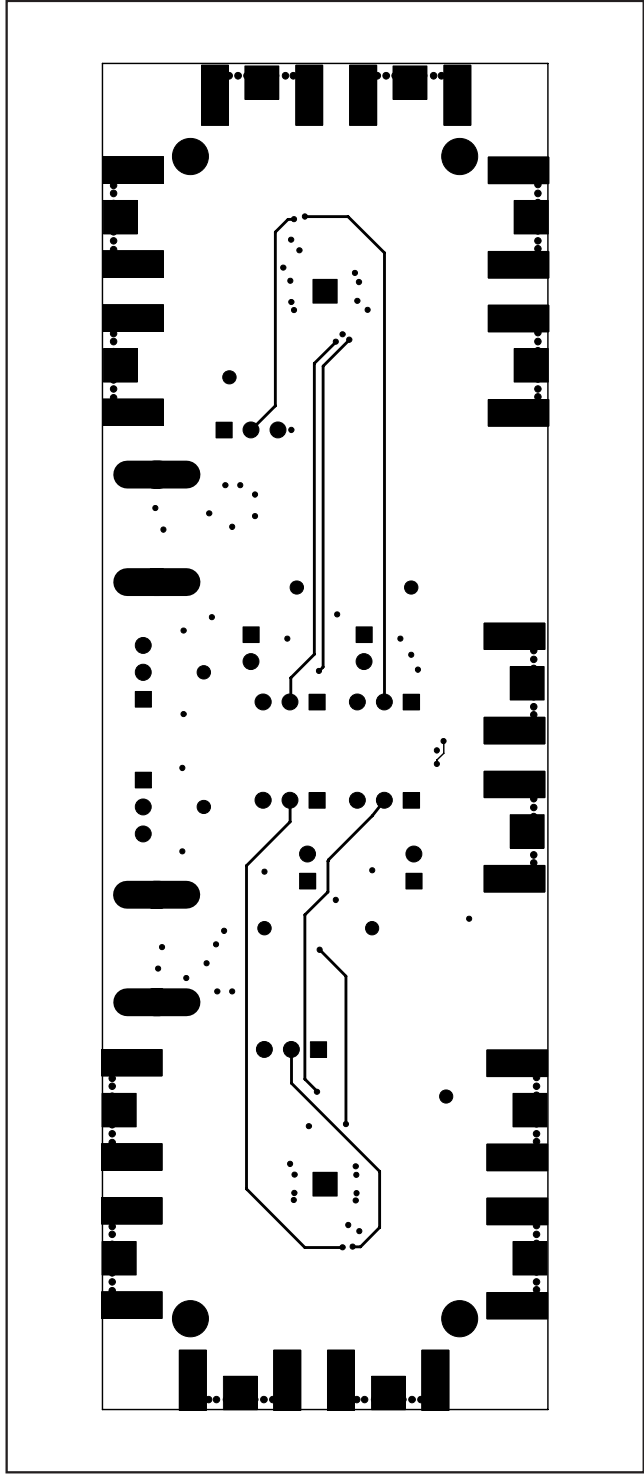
MAX3991/MAX3992 EV Kit PCB Layout—Solder Side
